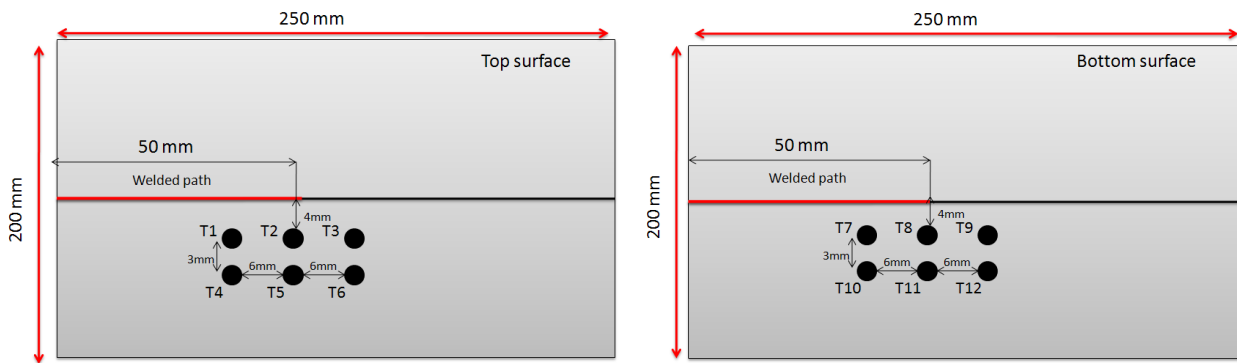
Locations of thermocouples on the top and bottom surfaces of welded joint
